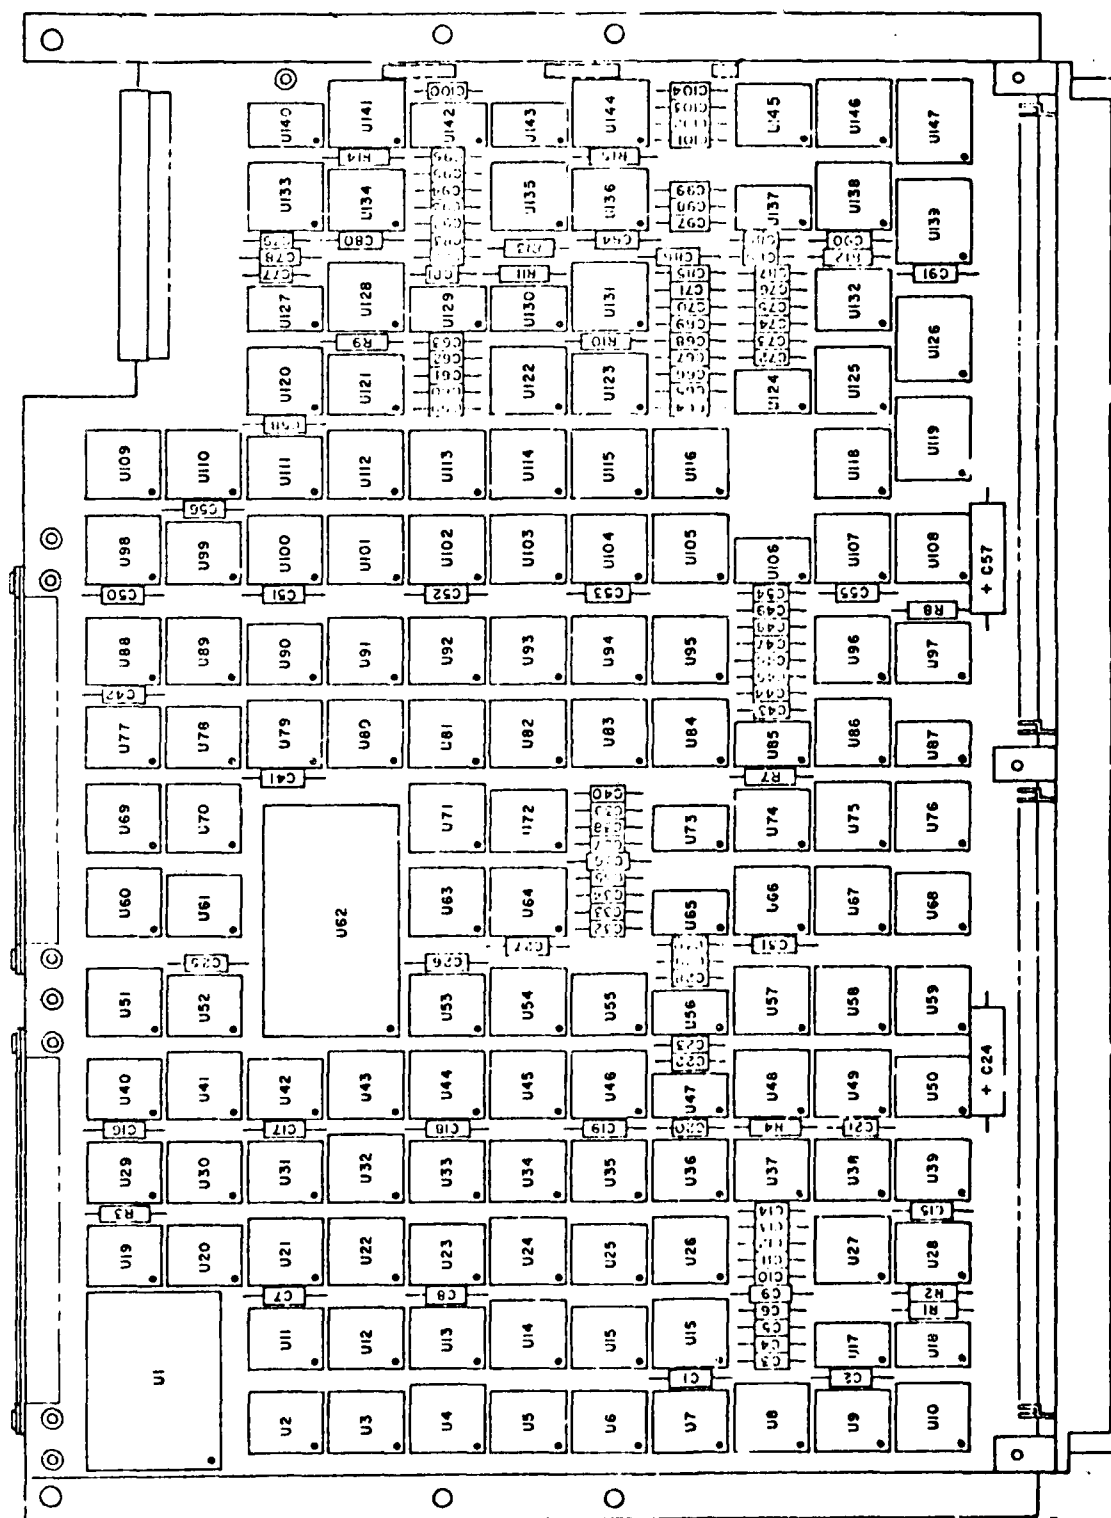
Discrete Interface Module, Circuit Card Assembly
